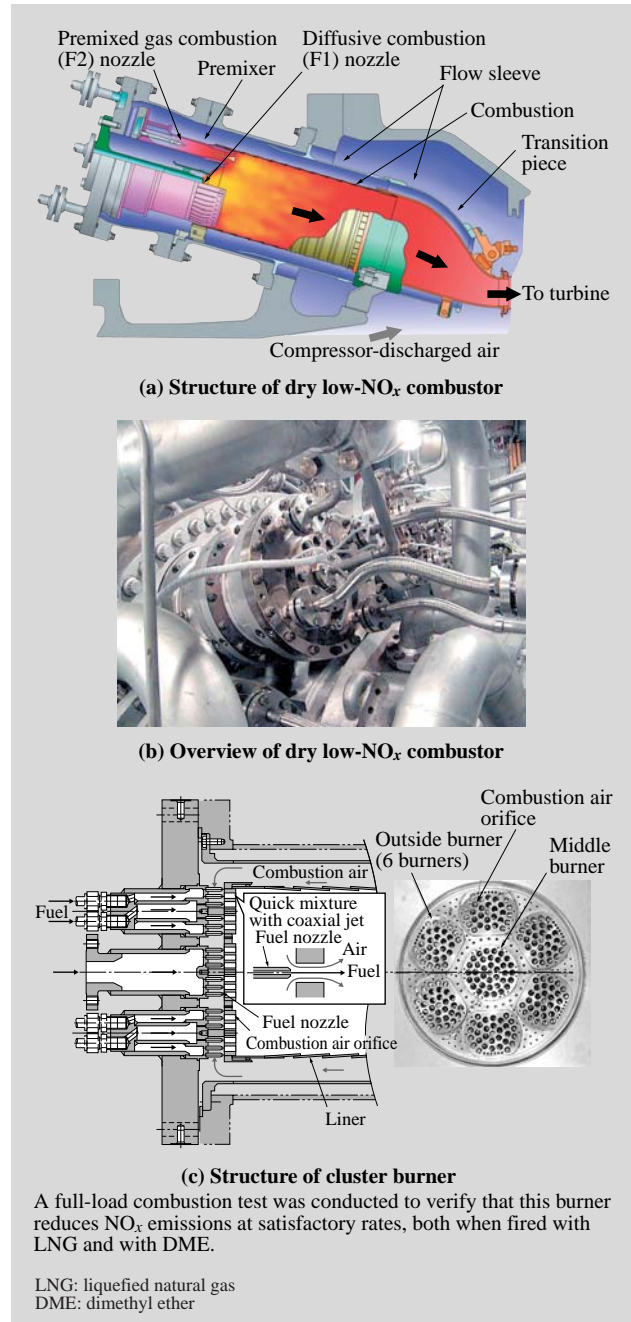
Combustor Technology in H-25 Gas Turbine. This is the technology used for the low-NO_x combustor and cluster burner in the H-25 gas turbine.
